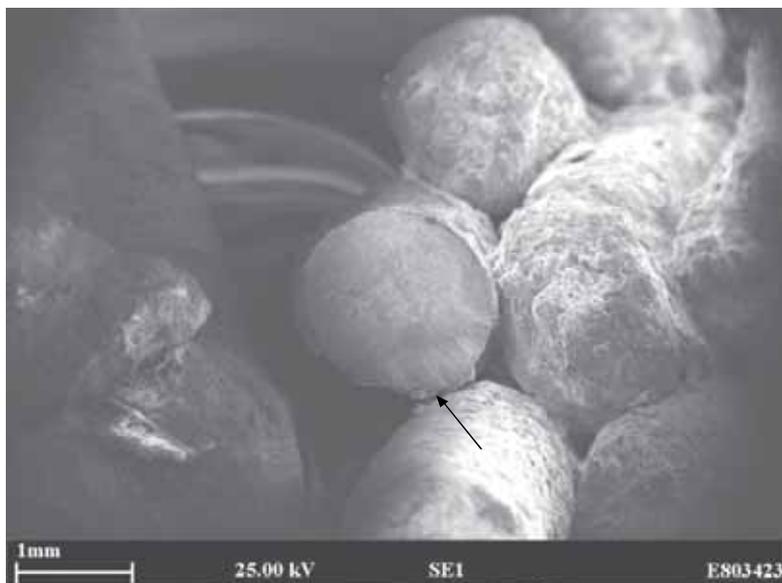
SEM fractograph, showing a transverse wire fracture (arrowed) exhibiting no apparent melting damage (Winch End Port Side sample).
